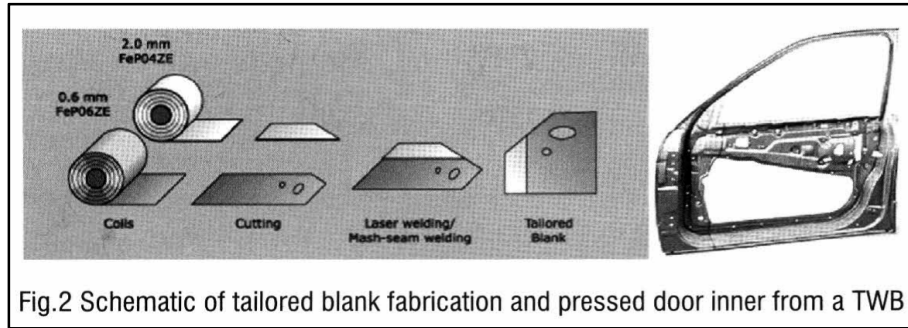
Schematic of tailored blank fabrication and pressed door inner from a TWB
